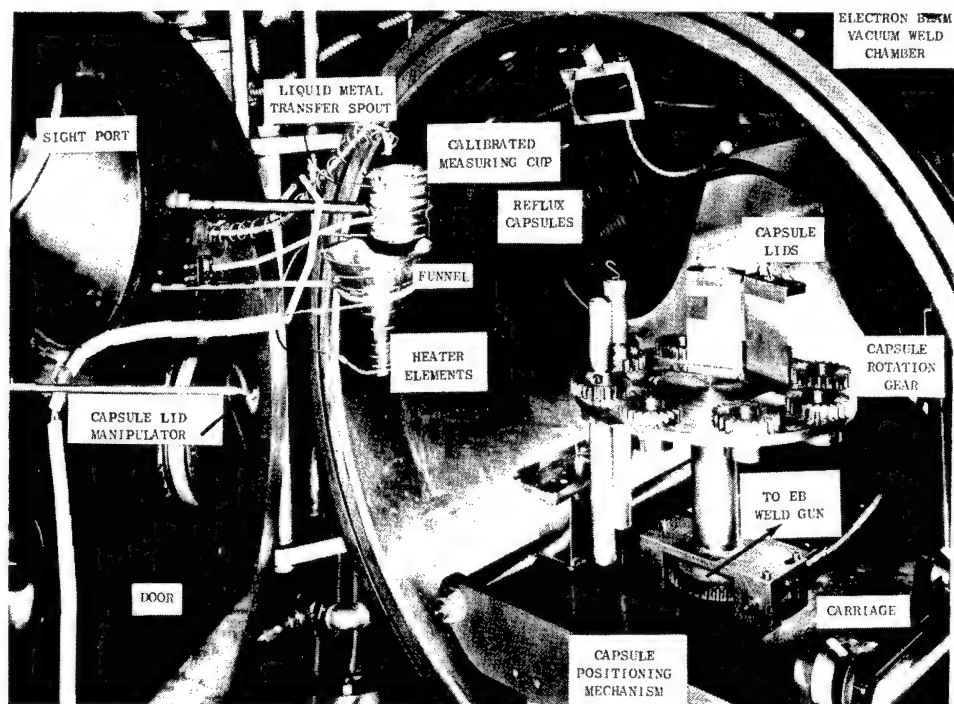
Internal view of the apparatus for filling capsules with liquid metal in a vacuum and sealing by electron beam welding.
